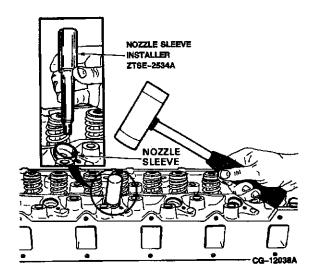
Drive Nozzle Sleeve into Bore Using Installer Tool
